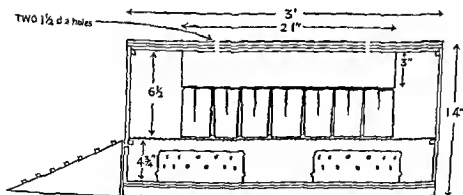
A SECTION OF A WARM-FLOOR BROODER
